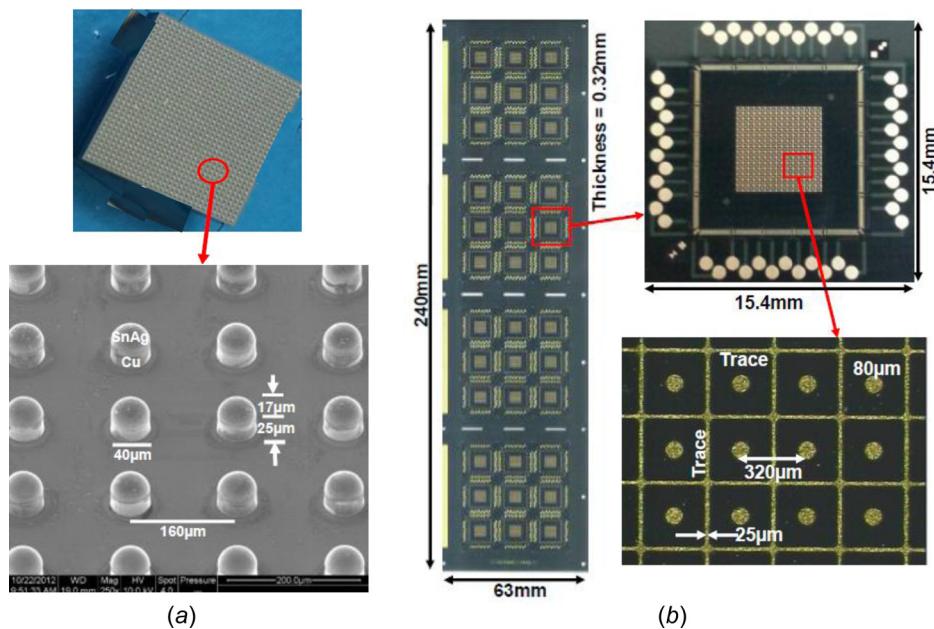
(a) Test chip with Cu-pillar + SnAg solder cap and (b) organic-panel substrate
